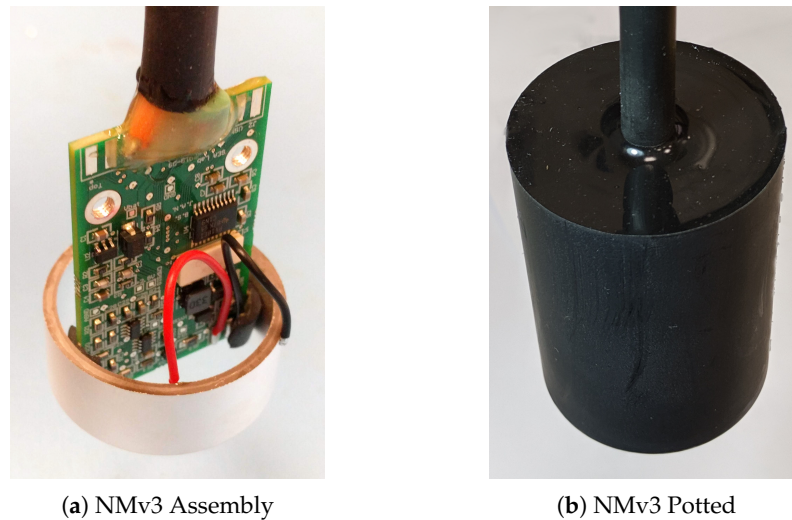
NMv3 acoustic modem showing (a) the PCB and crystal assembly and (b) the final potted modem.
